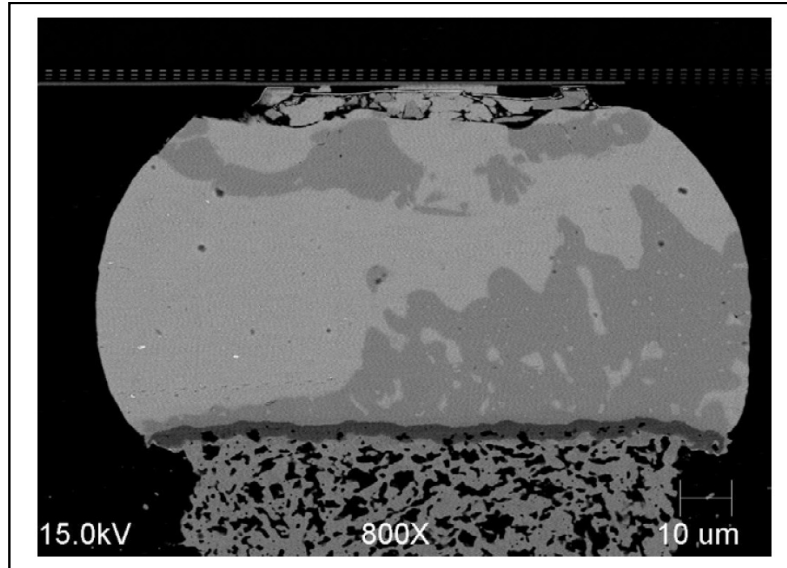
Solder joint cracking due to electromigration [ Su et al., 2005]
